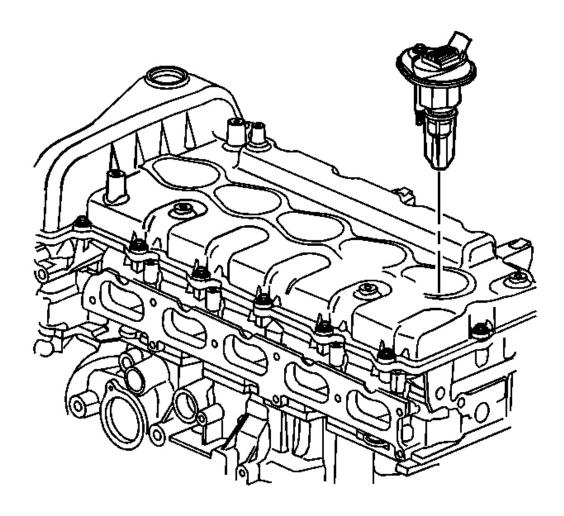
View Of Ignition Control Module Courtesy of GENERAL MOTORS CORP.
